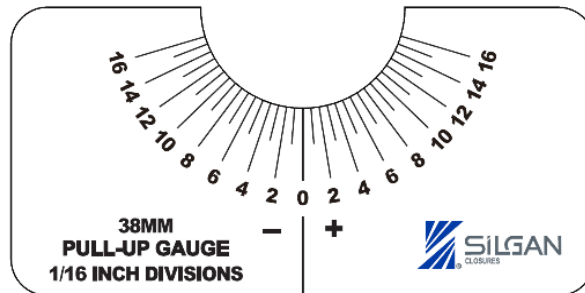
38mm Pull-up Gauge to complete Pull-up checks on 38mm closures.
